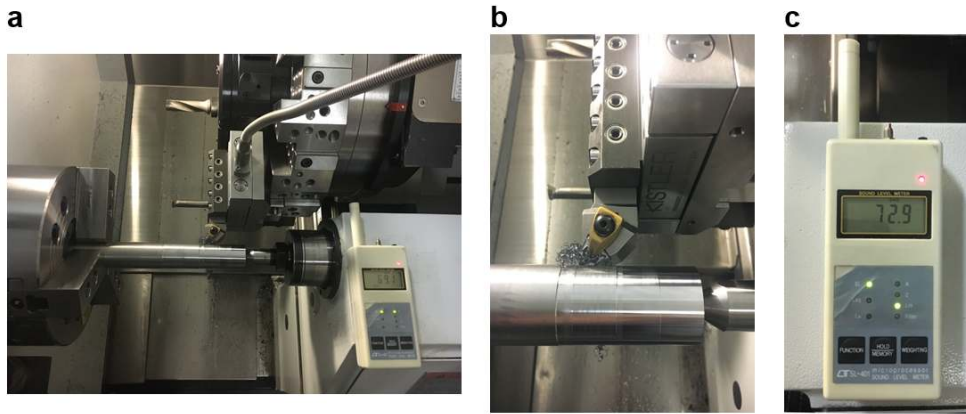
Setup for sound level measurement used in this work; a) Sound level measurement in CNC lathe, b) Close-up shot, c) Sound Level Meter
